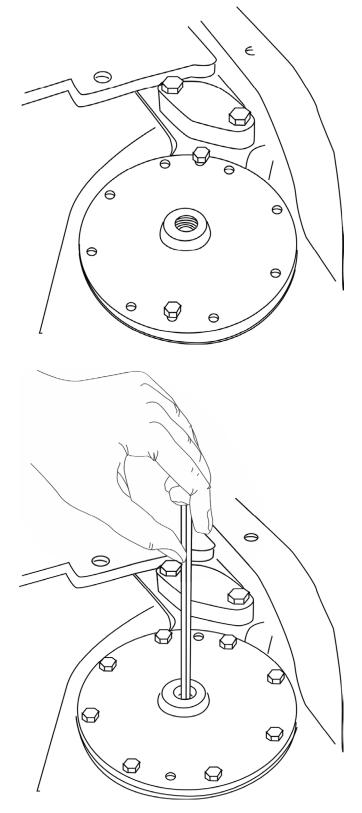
Gaterotor Thrust Bearing (VSG 301-701 Models)
